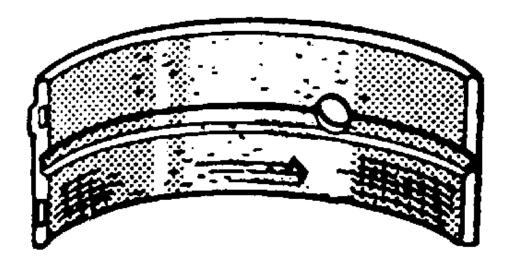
Identifying Crankshaft Bearing Craters Or Pockets Courtesy of GENERAL MOTORS CORP.
